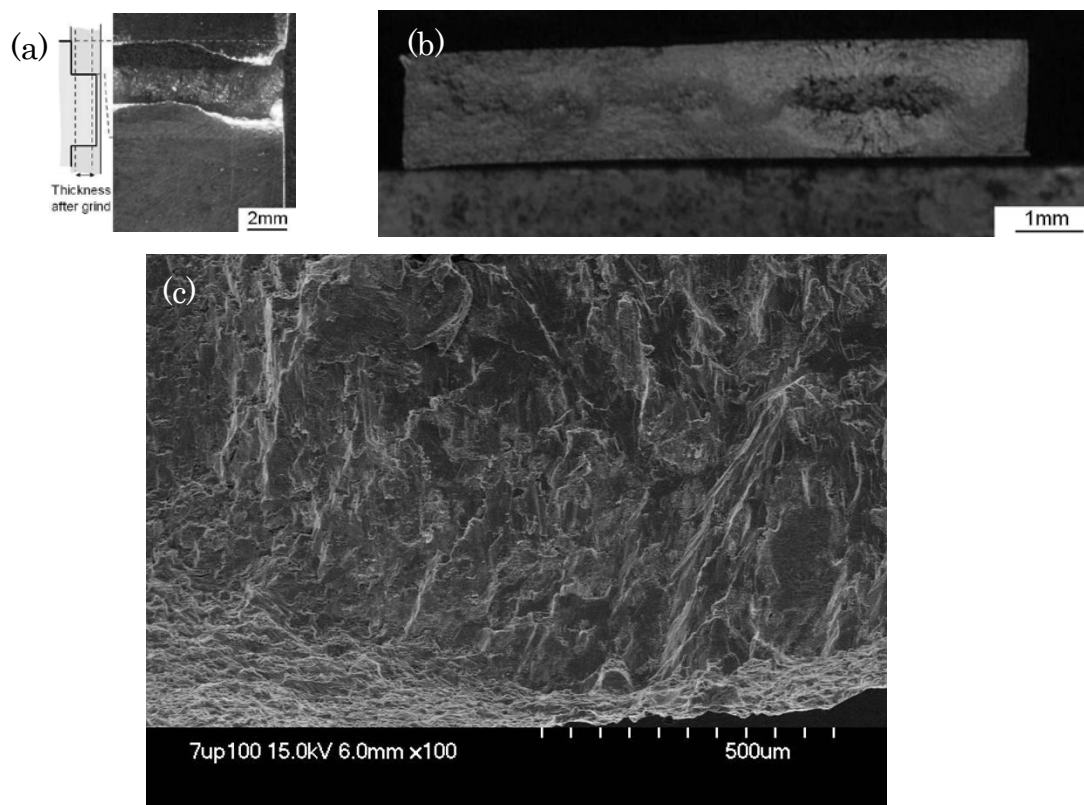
Typical fracture surface in case crack forms at inside of specimen (a) Fracture location, (b) Fracture surface, (c) Crevice surface
